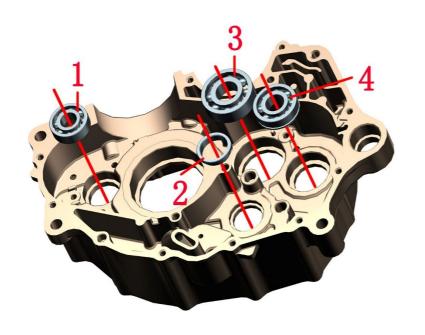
RIGHT CRANKCASE		ZT158MJ Right crankshaft box assembly-2	CHK	O
